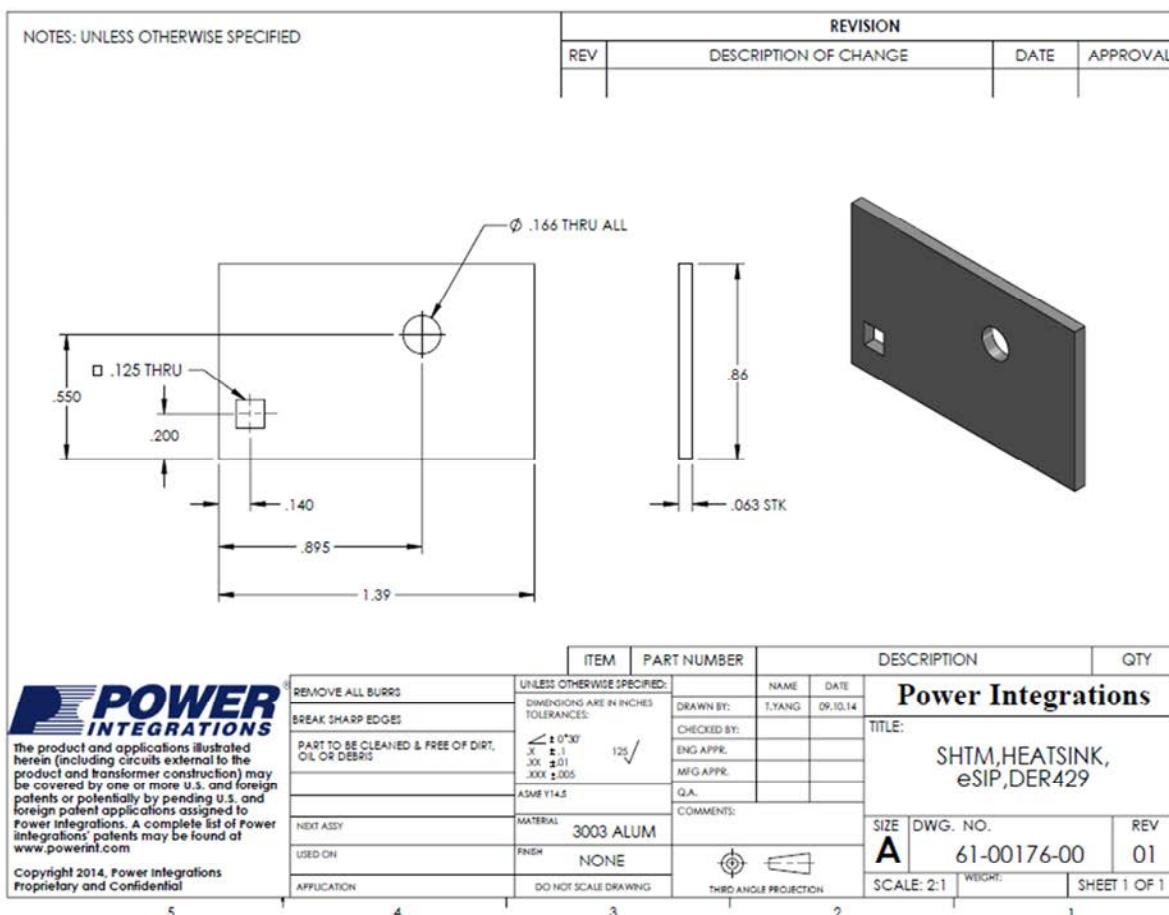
eSIP Heat Sink Fabrication Drawing.
